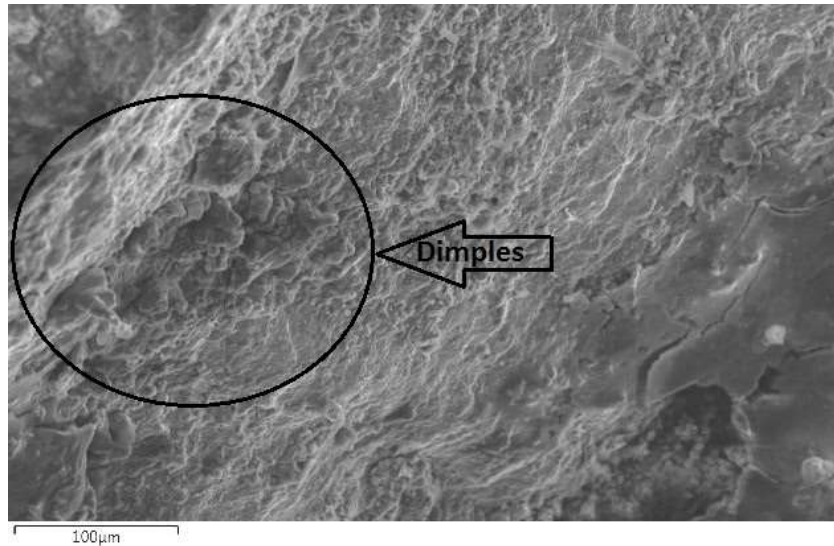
Dimpled appearance of fracture surface of non-clad fatigue samples
